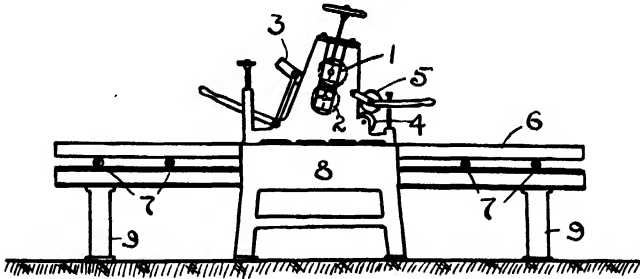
A MACHINE FOR FIGURED ROLLED PLATE.
